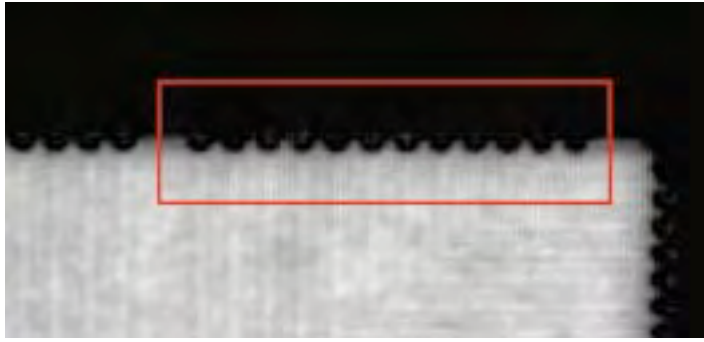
Acoustic image of one corner of a test chip before thermal cycling. Solder joint bonds are dark and it merges into the background since there are no fractures.
